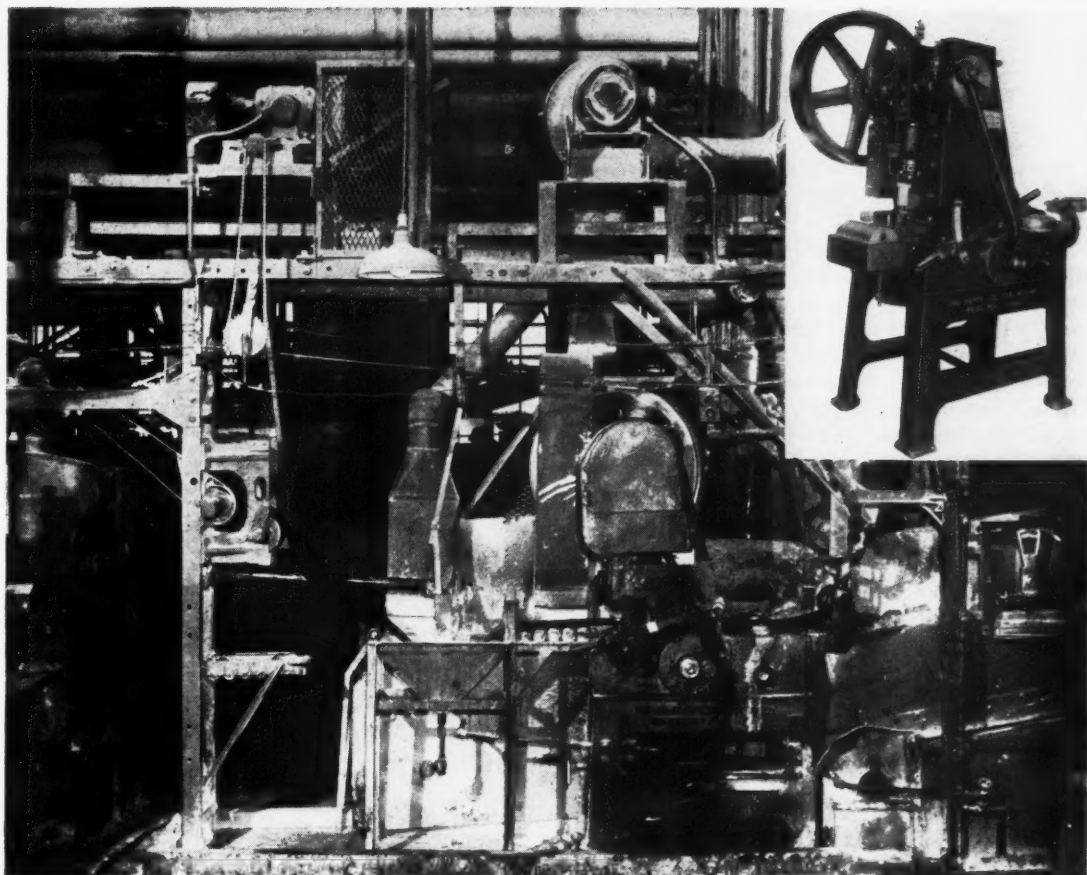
Strip feed entering dip tank just ahead of volumetric blanker for dieing out heel slugs in a plant of Goodyear Tire & Rubber Co. Inset shows close-up of volumetric blanker made by James Coulter Machine Co.
